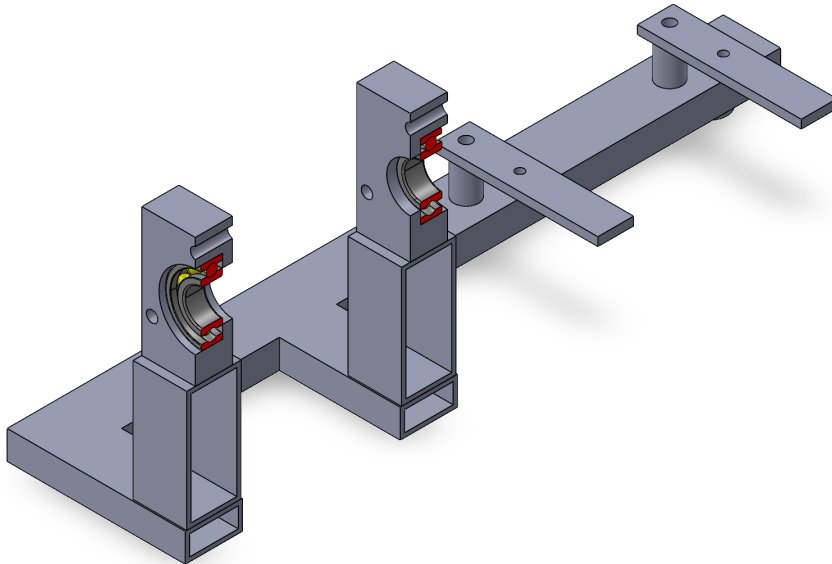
Section view of original frame assembly, the frame mainly consists of welded rectangular steel tubes with 3mm wall thickness.
